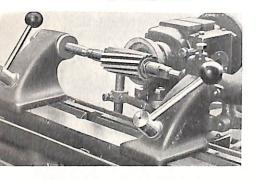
Grinding cutting face of teeth of large milling cutter on "Alba" grinder
